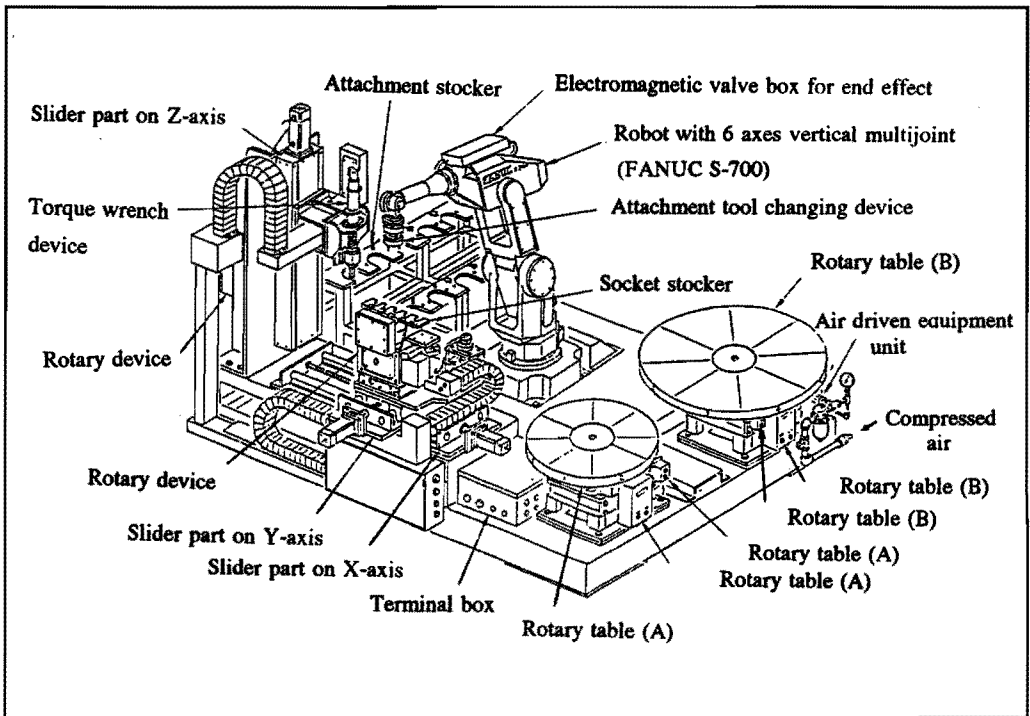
Disassembly robotic cell for brake equipment [Miyata, 1992].
